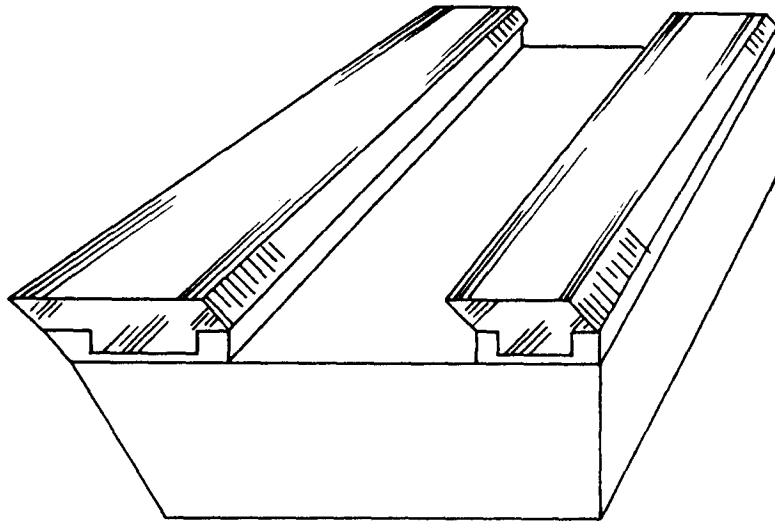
A schematic of a forming board. Flat, smooth surfaces are important.
